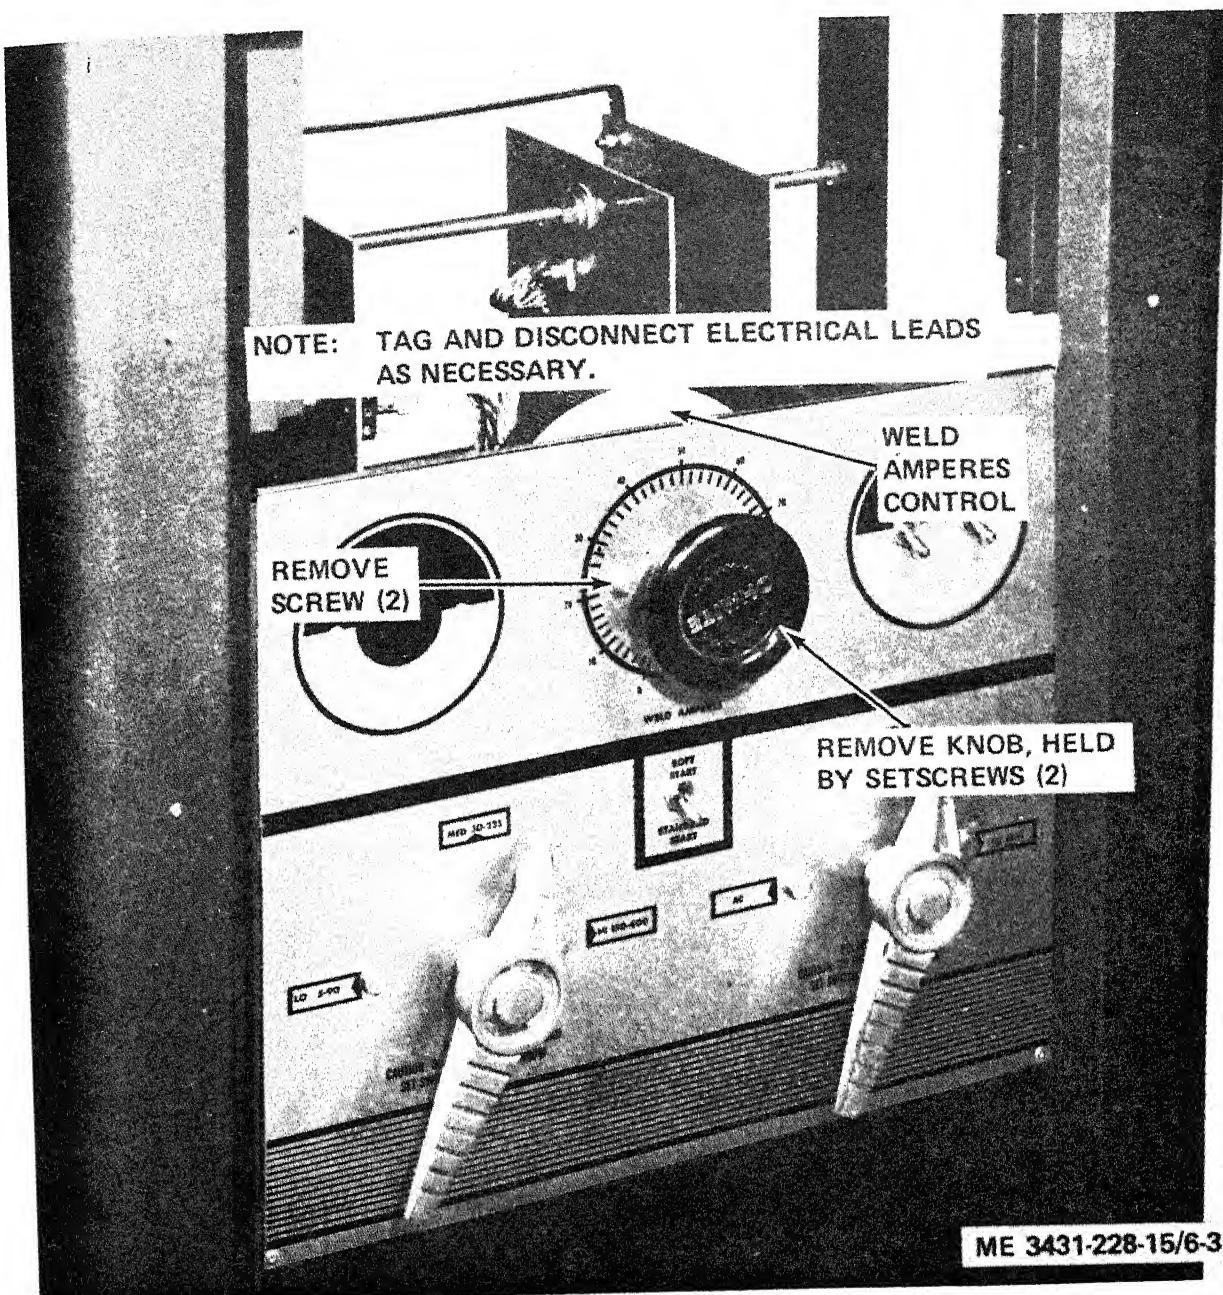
Weld amperes control rheostat, removal and installation.
